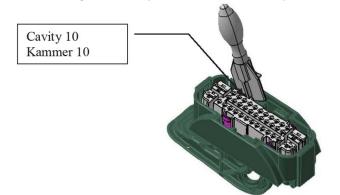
38-way connector, , positioning the operating tool; the operating tool has to be manufactured according to the drawing Nr 1 928 H00 394, see figure 39 Abb. 5: Kabelbaumstecker 38-polig, Ansetzen des Betätigungswerkzeuges; Betätigungswerkzeug ist zu erstellen gemäß Zeichnung Nr. 1 928 H00 394, siehe Abb.39
